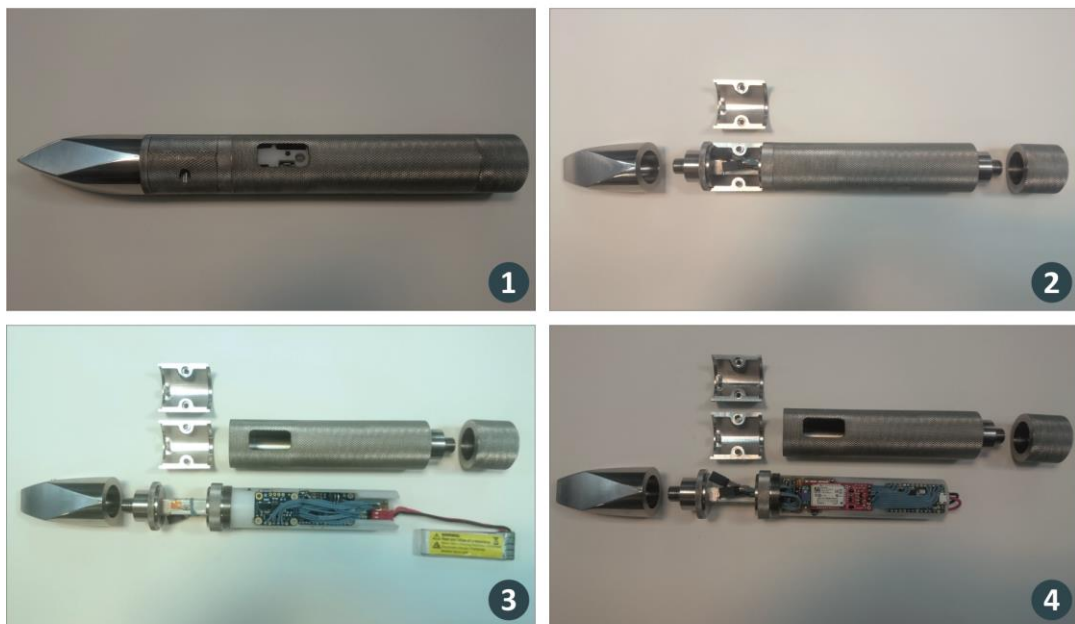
Several views of the smart carving tool, including the full assembly (1), the tool view with the strain gauges cover opened (2) and the full disassembled views of the smart carving tool (3 and 4)
